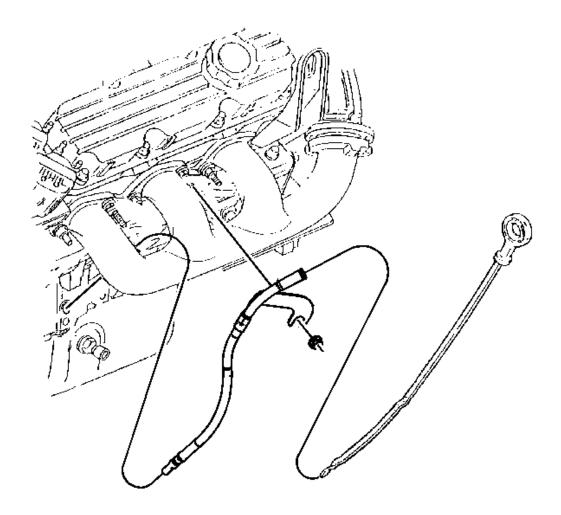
Oil Level Indicator, Tube & Nut Courtesy of GENERAL MOTORS CORP.
